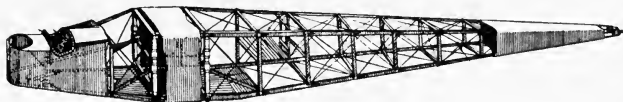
Fuselage of Handley-Page (o-400) Machine.
